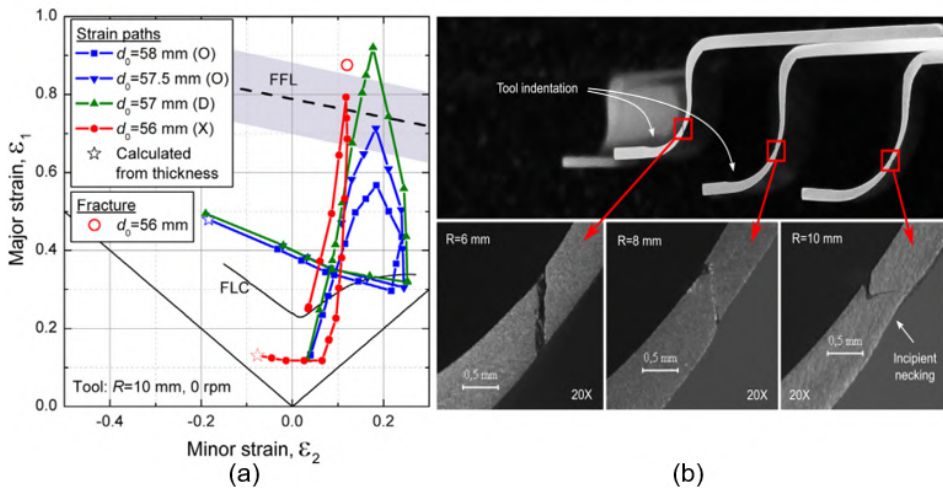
Hole flanging by SPIF in a single stage performed by Borrego *et al.* (2016): (a) strain analysis within the FLD of hole flanges processed by SPIF and (b) details of fractured specimens.
